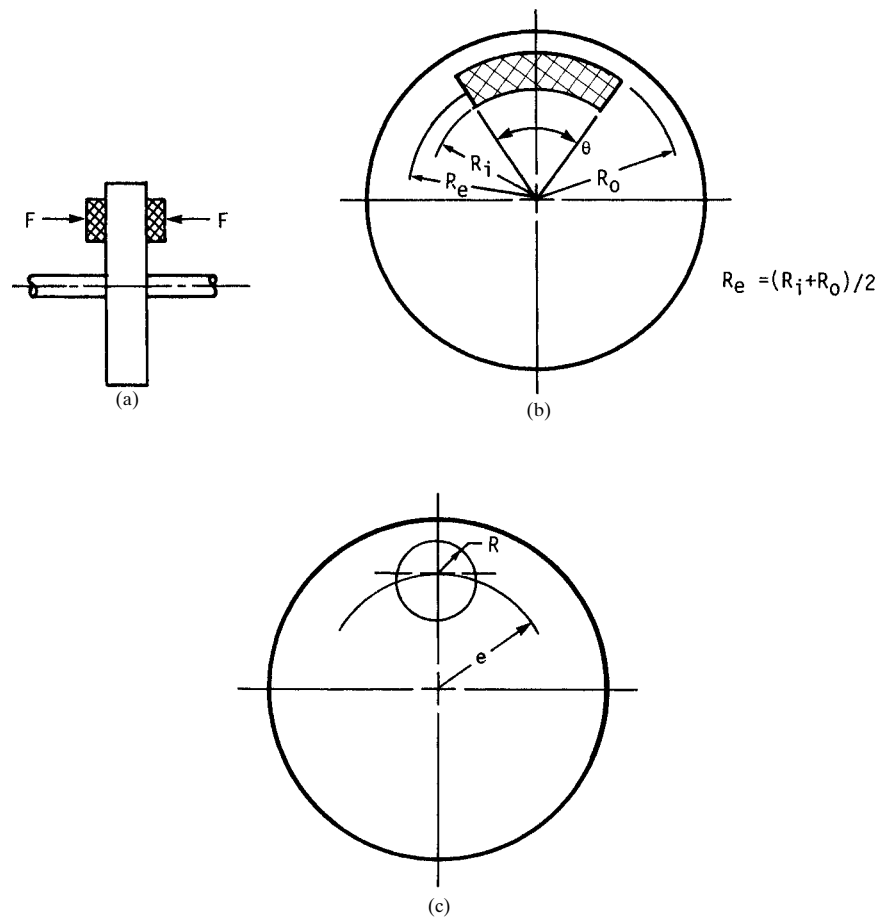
Caliper disk brake. (a) Principle of operation; (b) annular pad; (c) circular pad.
